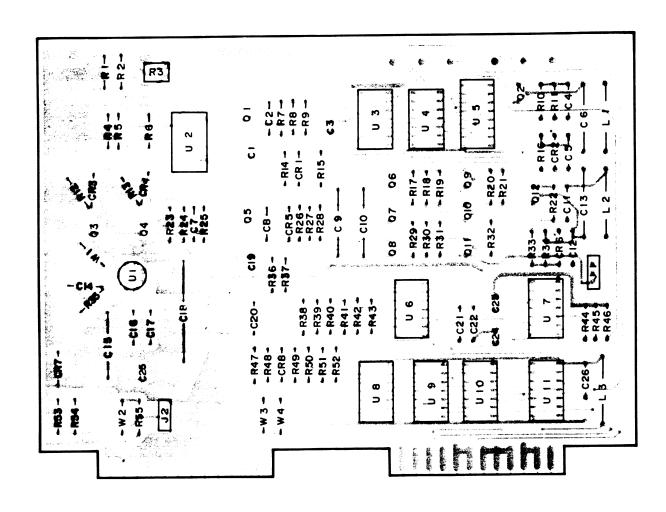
All Integrator Amplifier Board Assembly Component Locations.
